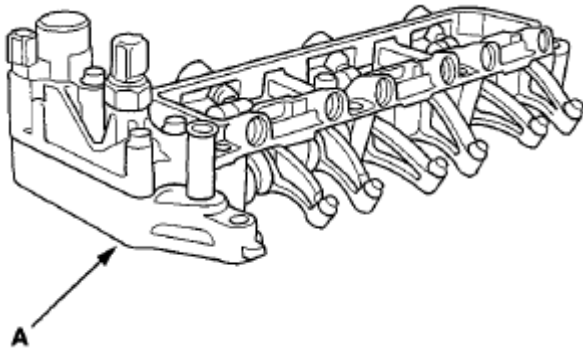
Identifying Front Rocker Arm Oil Control Valve
